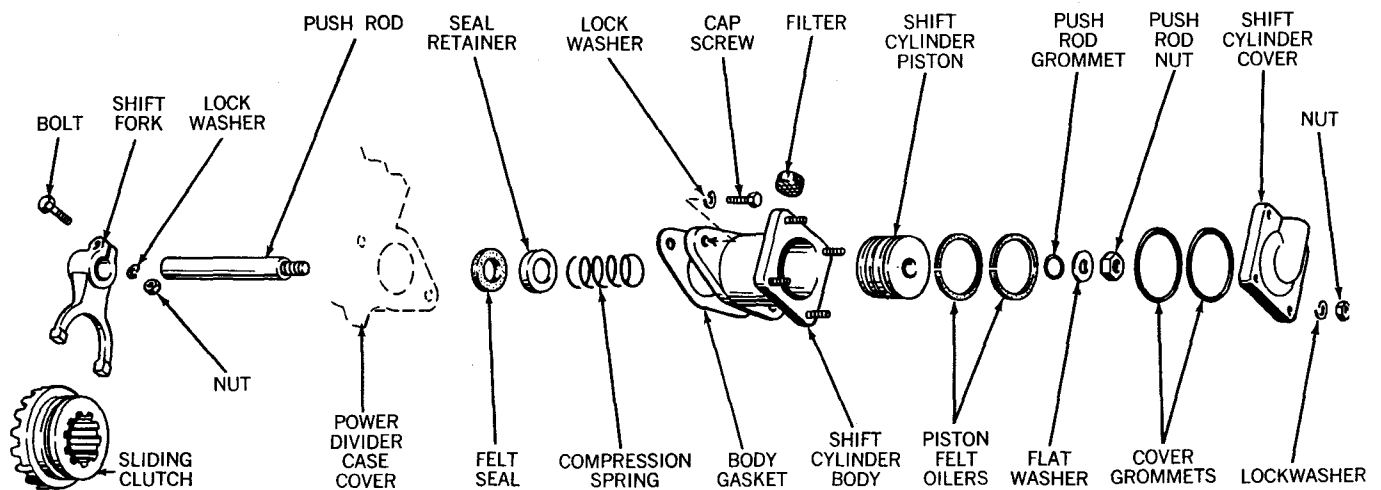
Exploded View of Air-Operated Lockout Mechanism
